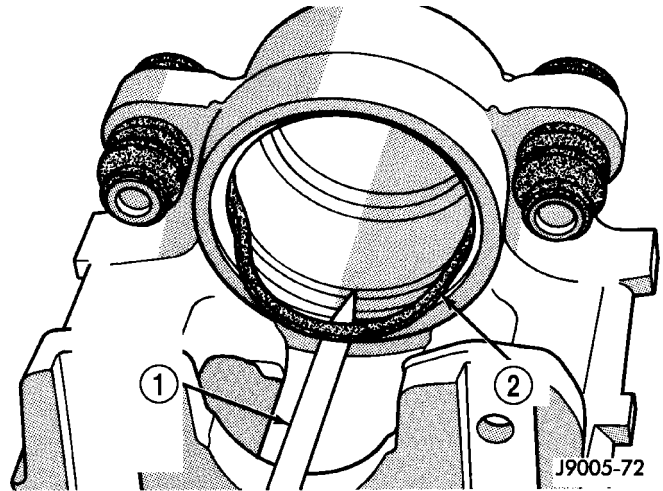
PISTON SEAL REMOVAL - TYPICAL
